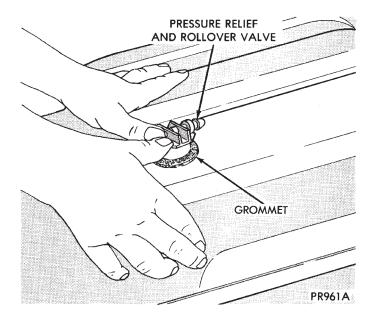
Removing Pressure Relief/Rollover Valve—Front Wheel Drive.
